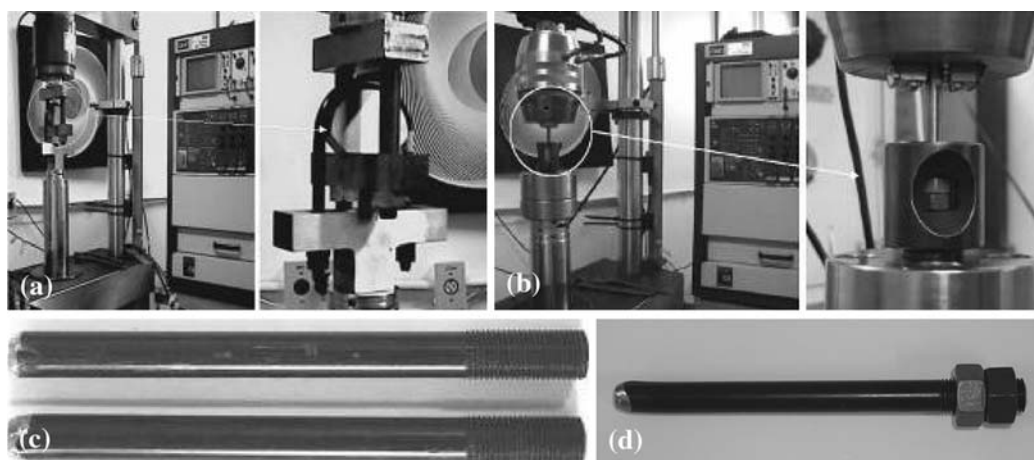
Fatigue test: (a) and (b) assembling; (c) sample removed from the bolts; and (d) sample ready to be tested
